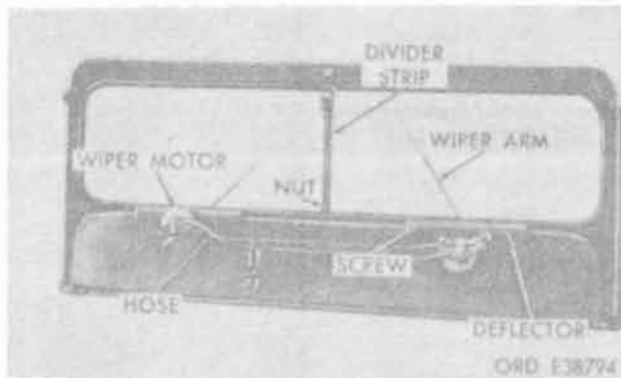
Windshield divider strip and wiper motors (M151, M151A1, M151A1C and M718 vehicles).
